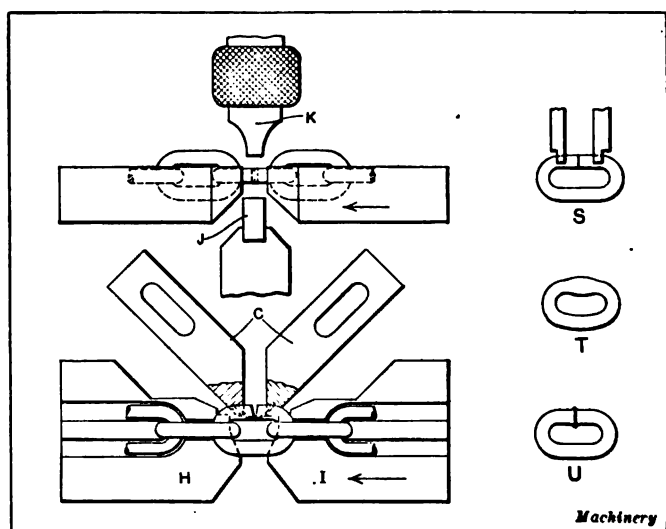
Diagram showing Operation of Chain-welding Clamping Dies and Electrodes; also Results of Finished Work — Thomson Electric Welding Co.
